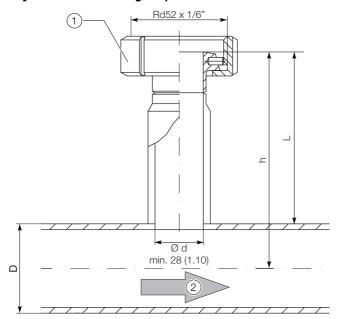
Welding adapter with flange - all dimensions given in mm (inch).
